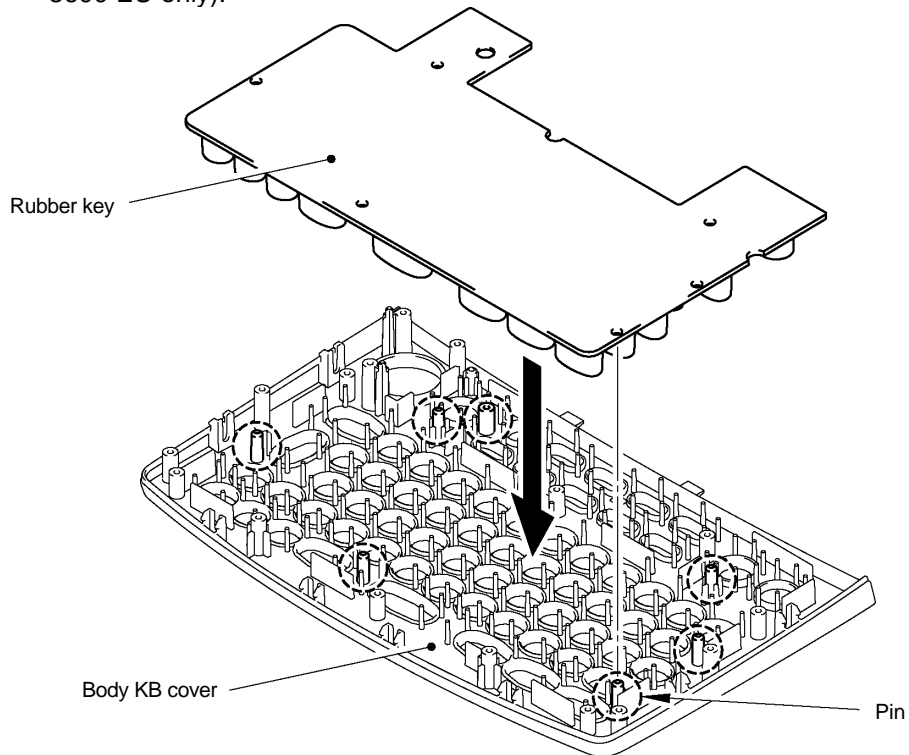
Reassembling the KB Unit/Rubber Key Unit (2)
